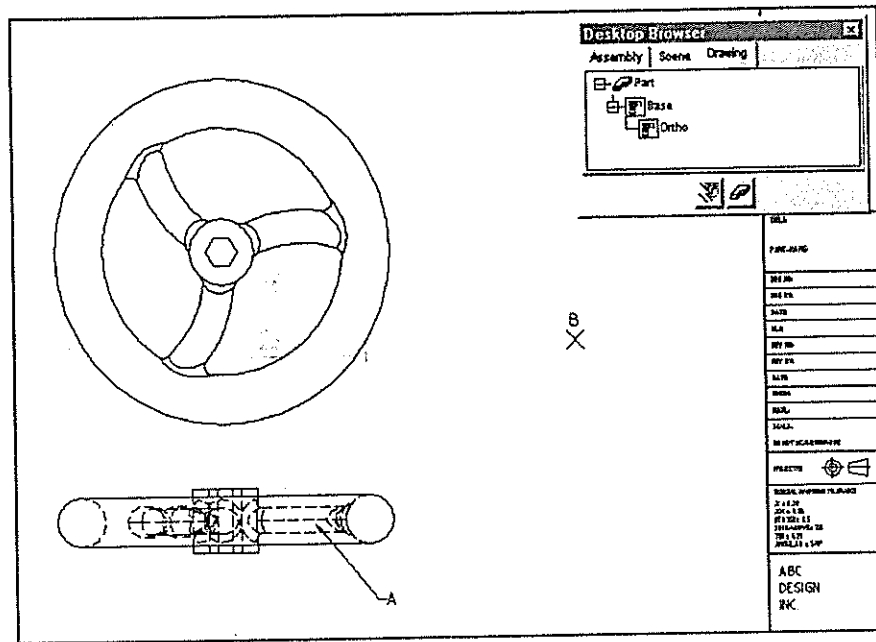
Drawing mode, title block inserted and drawing views constructed
